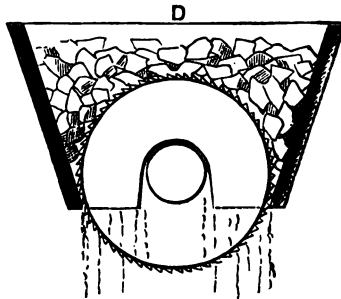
SECTIONAL VIEW OF HOPPER.
